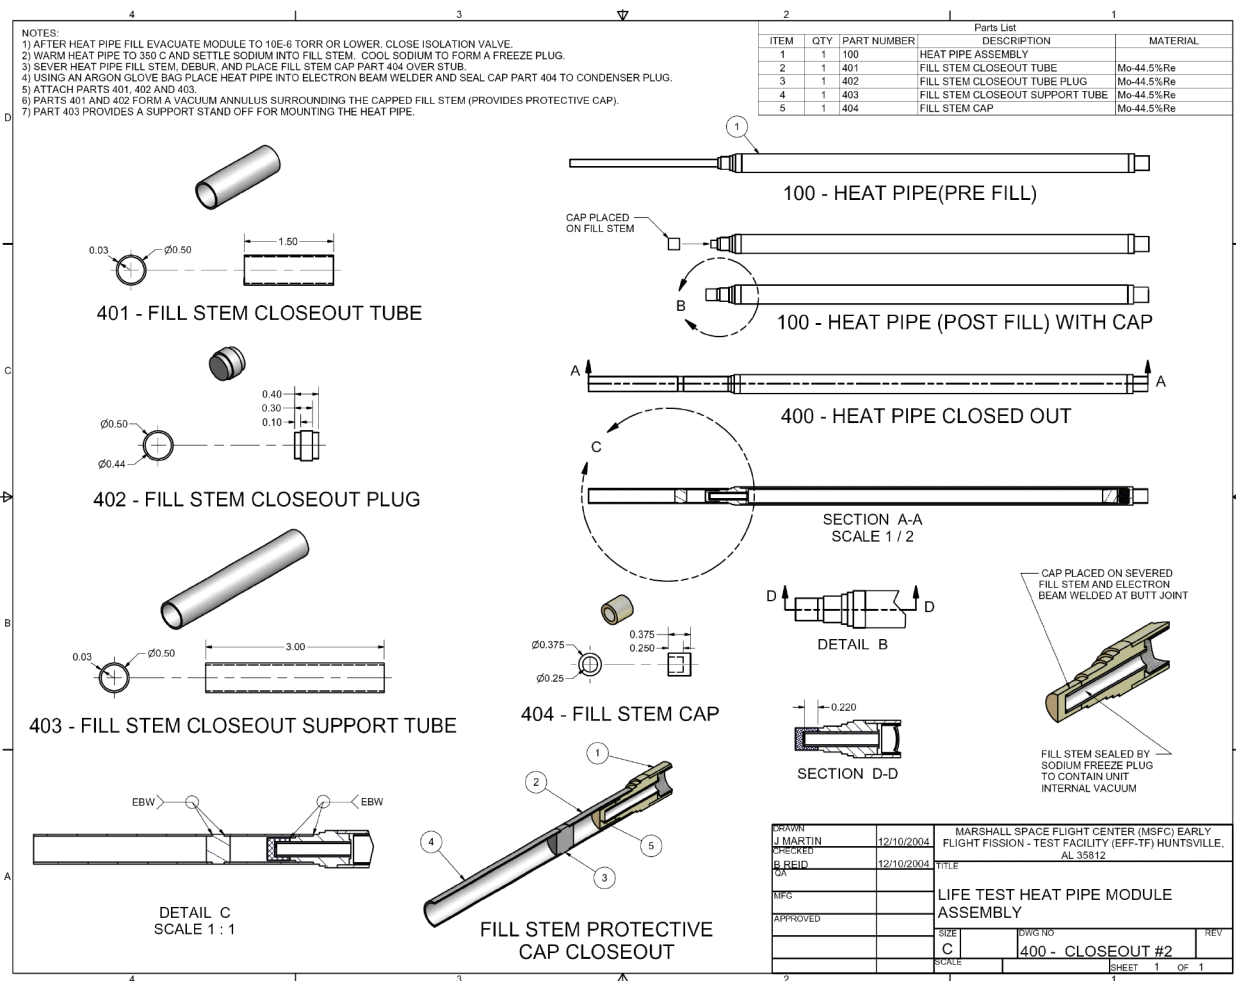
Method 2 to close out the heat pipe fill stem and provide mounting support.
